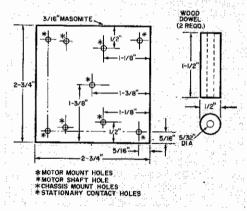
Fabricate the rotary switch on a  $2\frac{3}{4}$ " x  $2\frac{3}{4}$ " piece of Masonite and bolt it to the chassis using two  $\frac{1}{2}$ "-long dowels and 2"-long screws.
